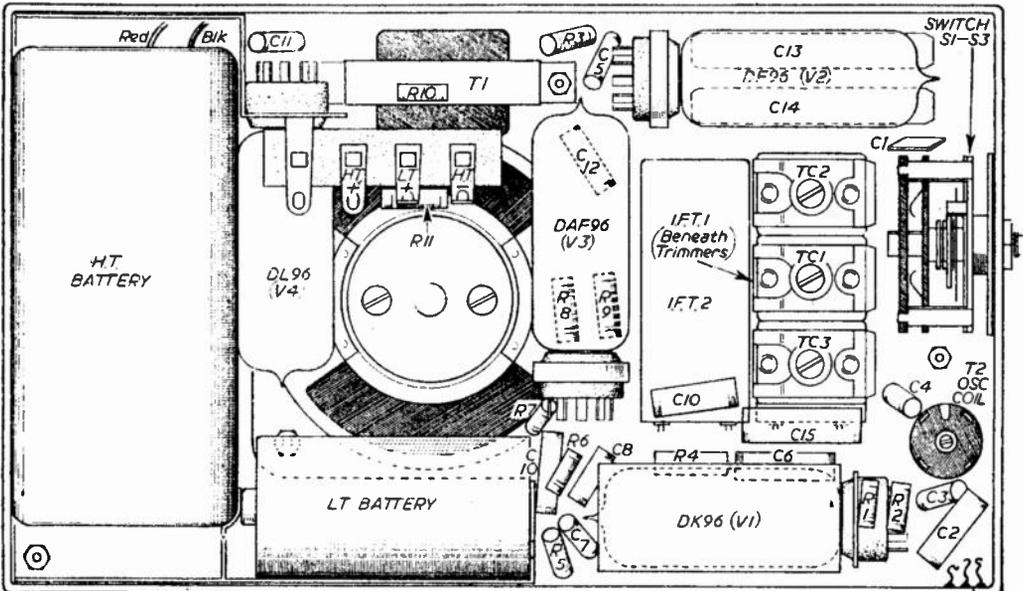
Layout of the receiver and identification of components. The circuit is on page 382.
